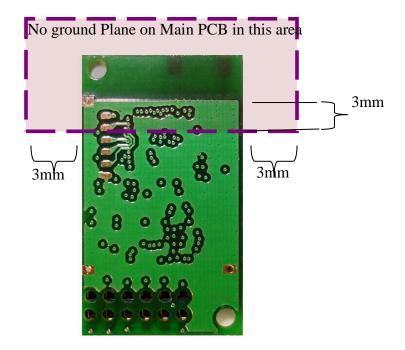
Bottom View of PCB indicating where there should be <u>NO Ground</u> <u>Plane</u>
